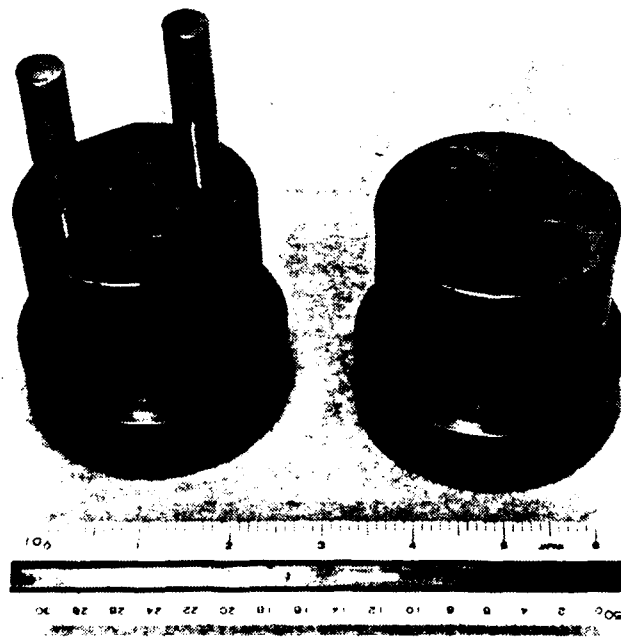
Photograph of Wyoming-Modified Celanese Compression Fixture
